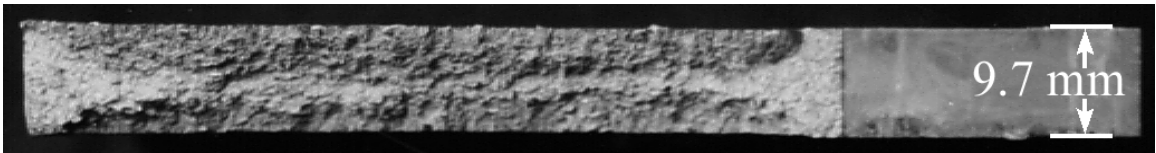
Fracture surface of 6Al-4V Ti ELI specimen loaded dynamically.
